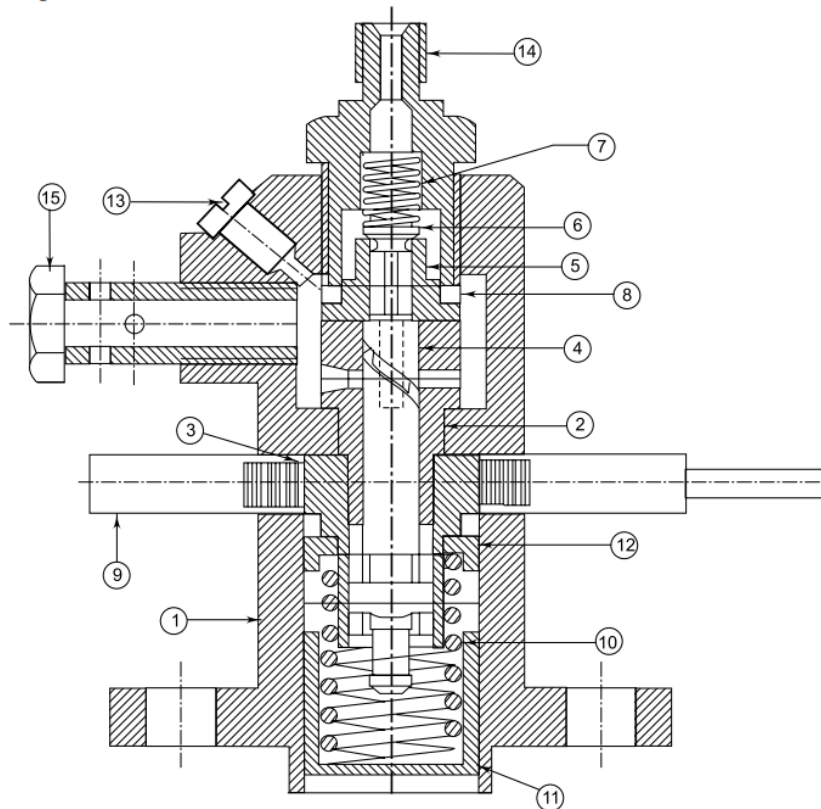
A Assembly Drawings of a Diesel Fuel Pump
